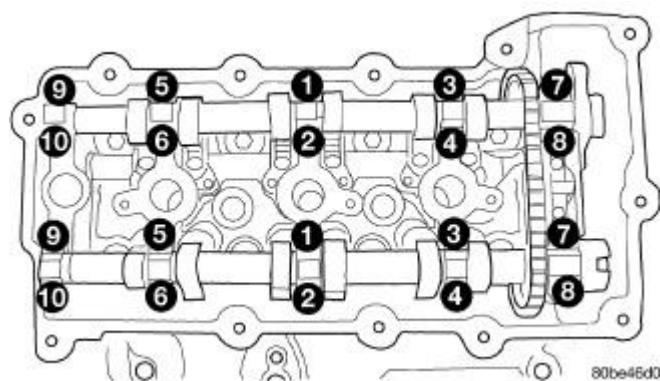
Camshaft Bearing Cap Tightening Sequence
